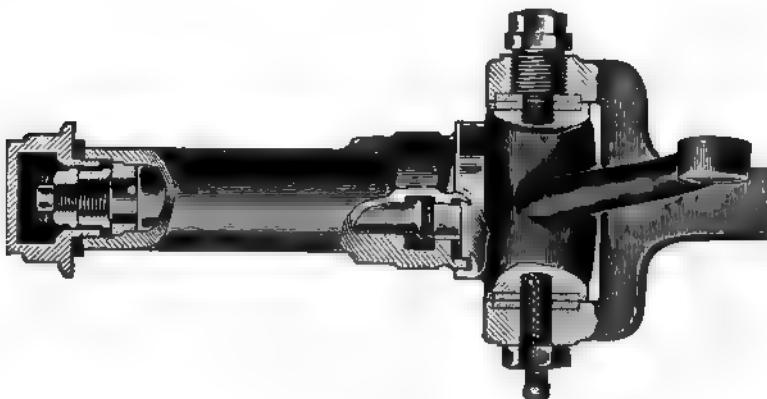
A Type of Stud Steering Axle, showing steering arm and pivot and plain bearing axle and box.
